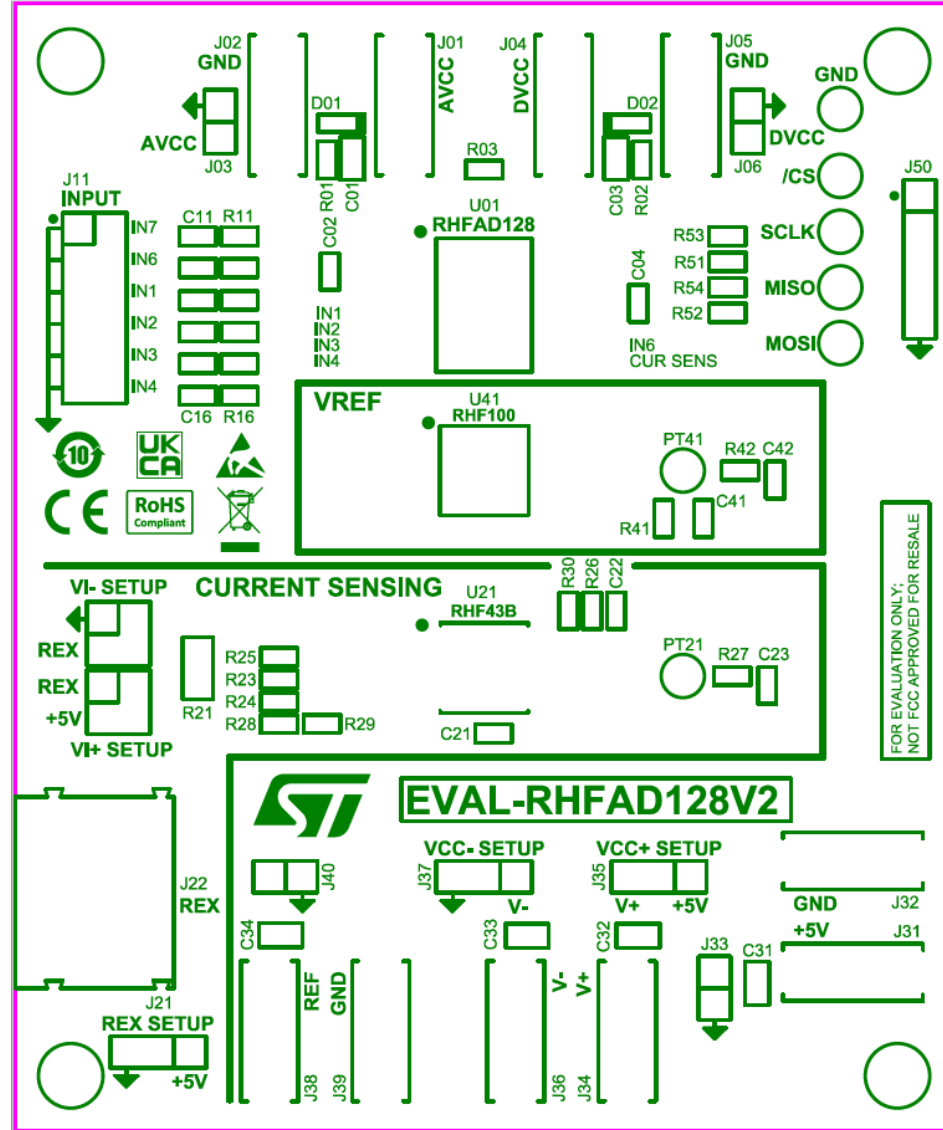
EVAL-RHFAD128V2 board PCB top overlay
